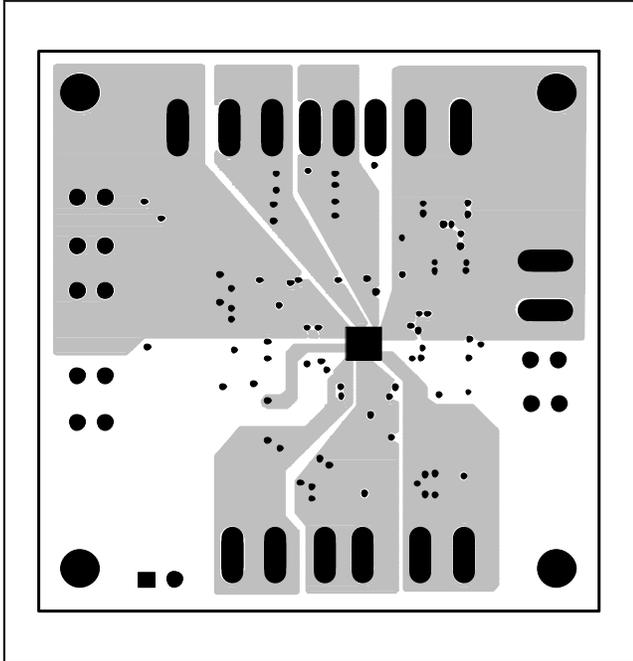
MAX8857A EV Kit PCB Layout—PGND Layer 3
